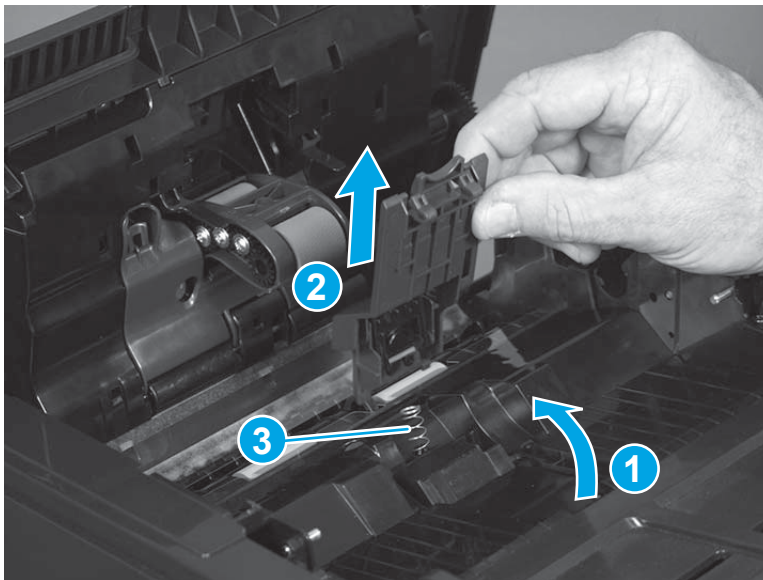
Remove the document-feeder separation pad and holder (M680; 2 of 3)
